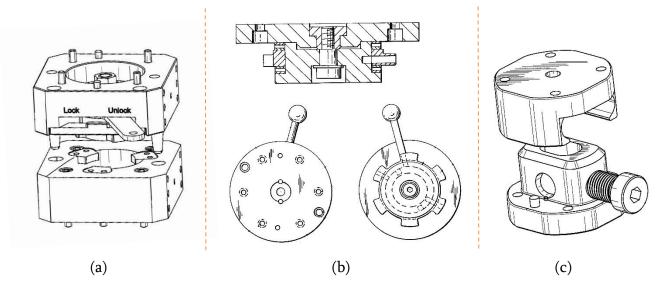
Manual Tool Changers Mechanisms; (a) Tool Changer with Rotating Piston; (b) Tool Changer with Rotatable Sprocket; (c) Tool Changer with Rolling Members
